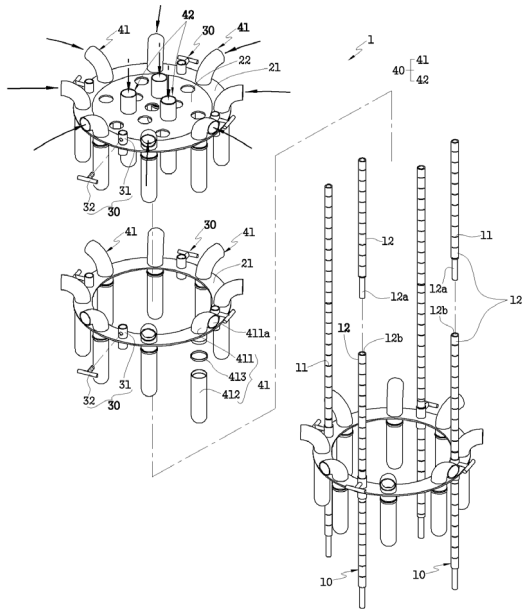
Exploded perspective view of sediment and suspended particle sampler.
